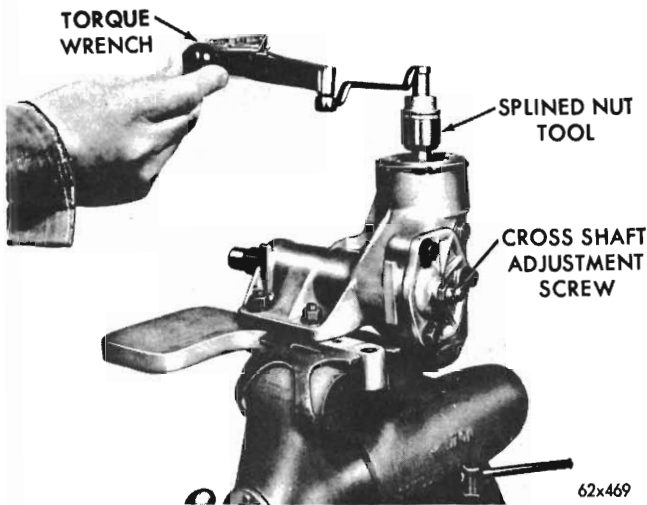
Testing ball nut rack and cross-shaft sector mesh (typical)
